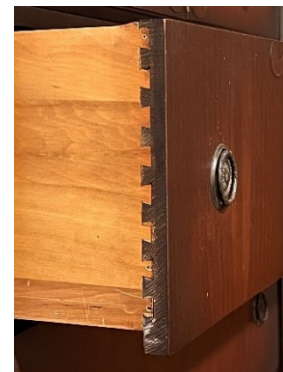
Mechanical interlocking using dovetails used in woodworking.
